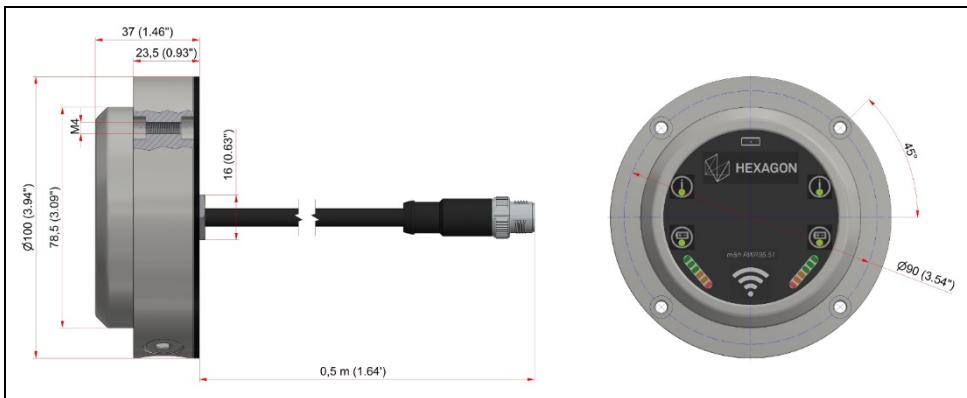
Dimensions RWR95.51-A-SP (cable outlet axial)
